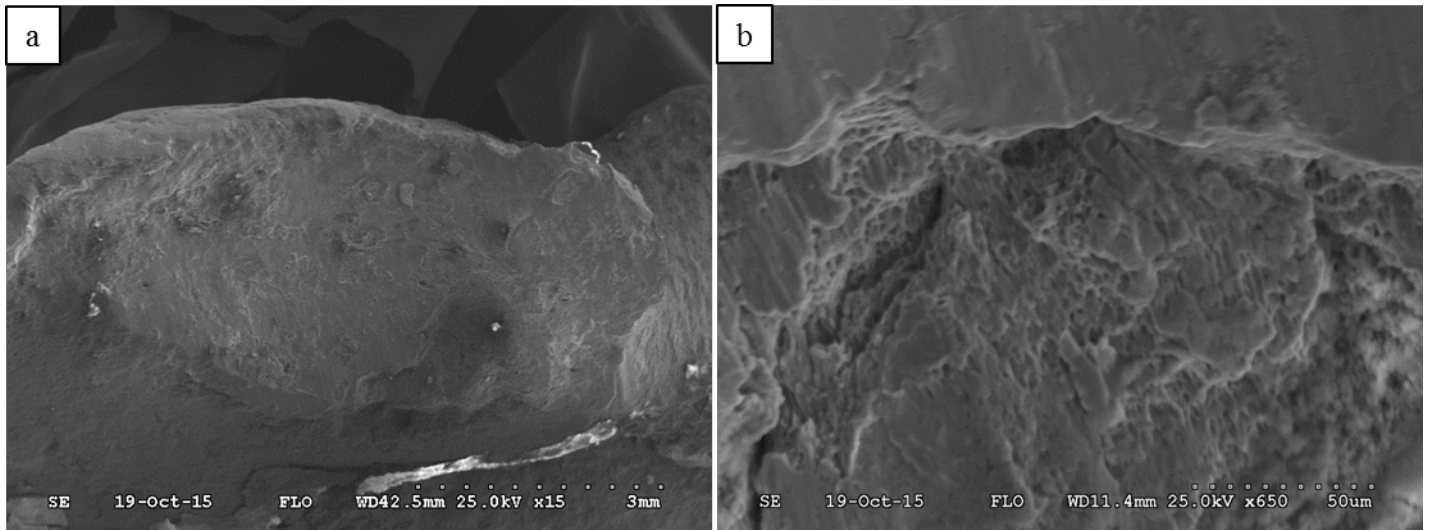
Image in SEM of failed spot weld. b: SEM images showing dimpled fracture surface consistent with overload.
